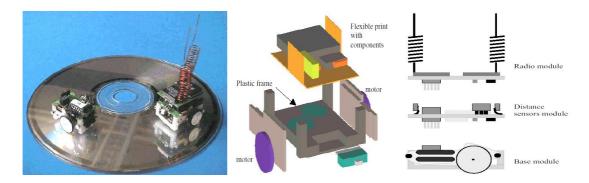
Alices on a CD-ROM, base module assembly and modularity of Alice [51].
